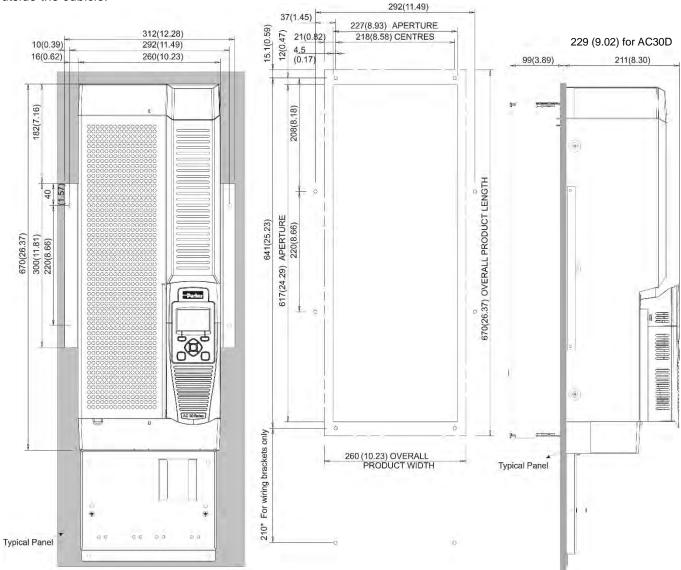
Mechanical Dimensions for Through Panel Frame H
